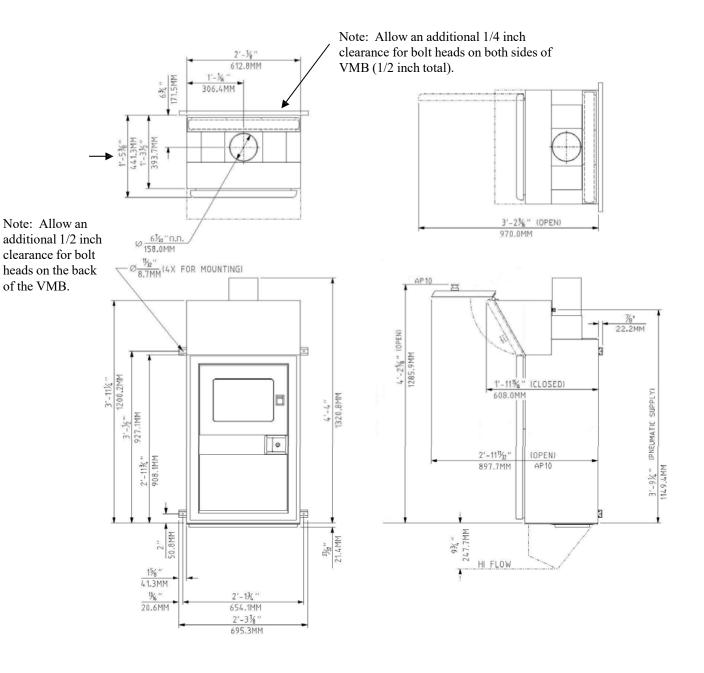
Outline Dimensions 24" Valve Manifold Box Rack (4 stick)
